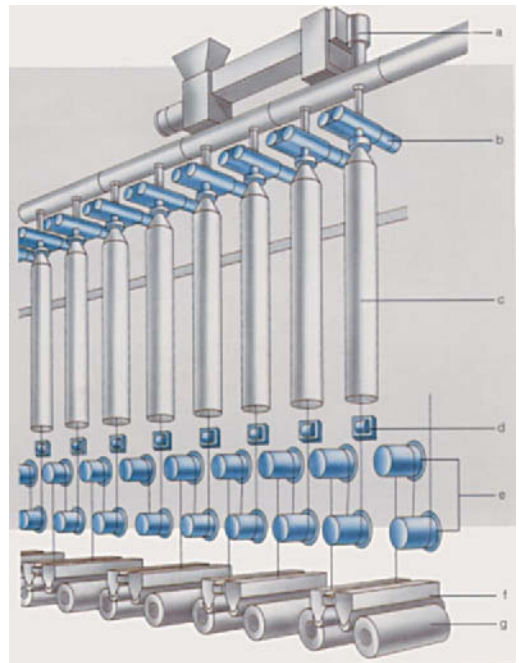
Diagram showing a spinning-drawing-winding machine.
